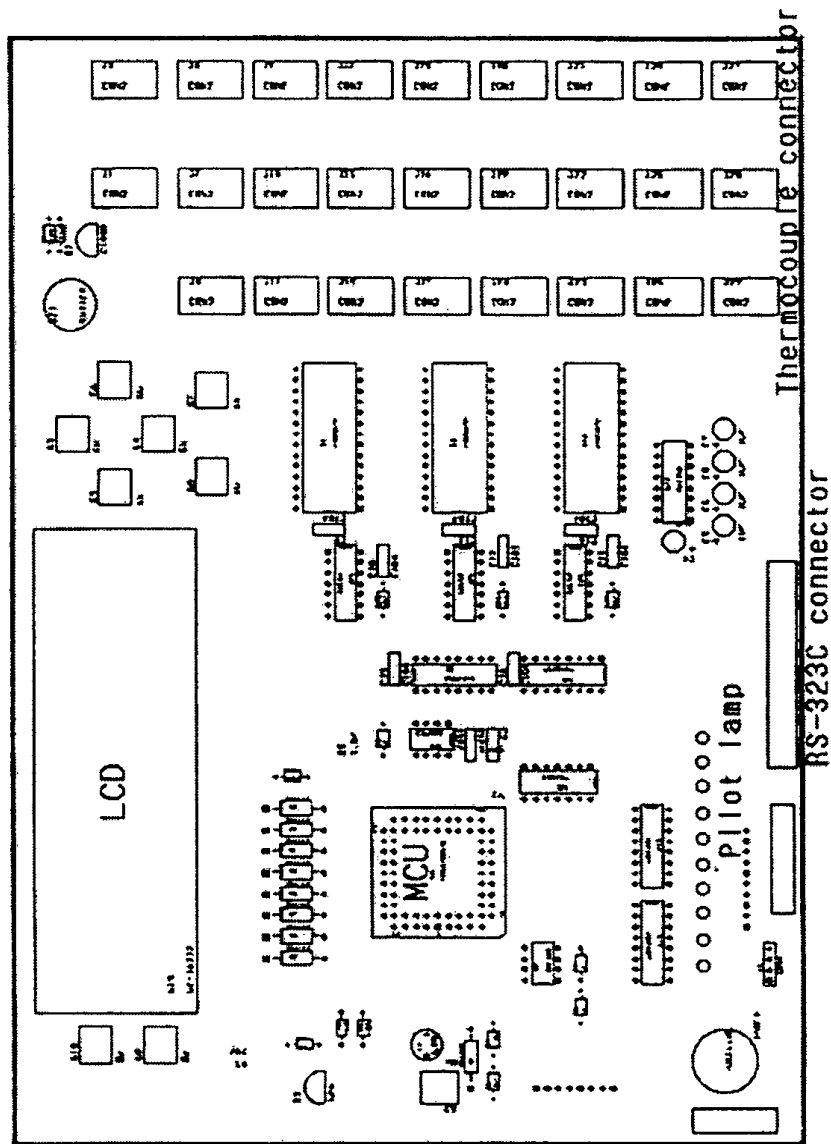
Assembly layout of the components for the PCB of food machine controller
